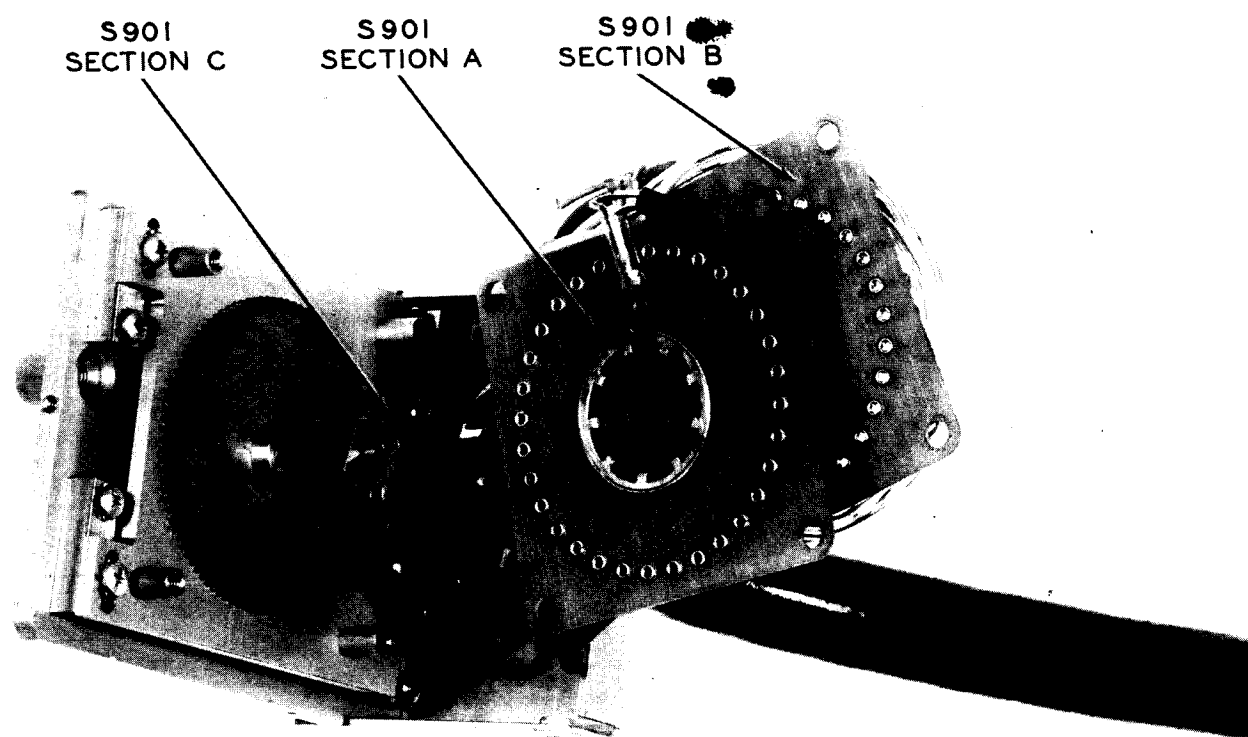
Electrical Specail Purpose Cable Assembly CX-1619/U,
